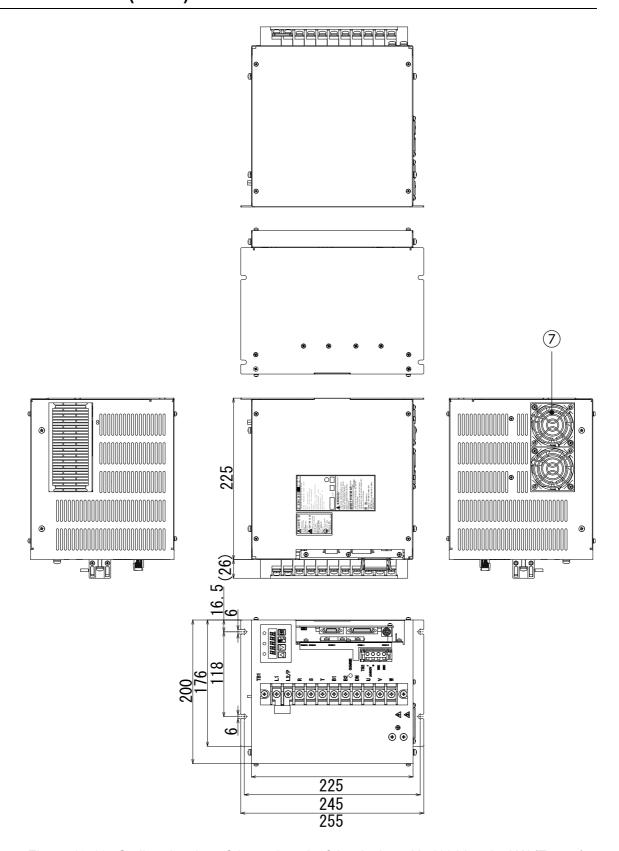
Outline drawing of the main unit of the device with 400 V and 7 kW (Type 7)
